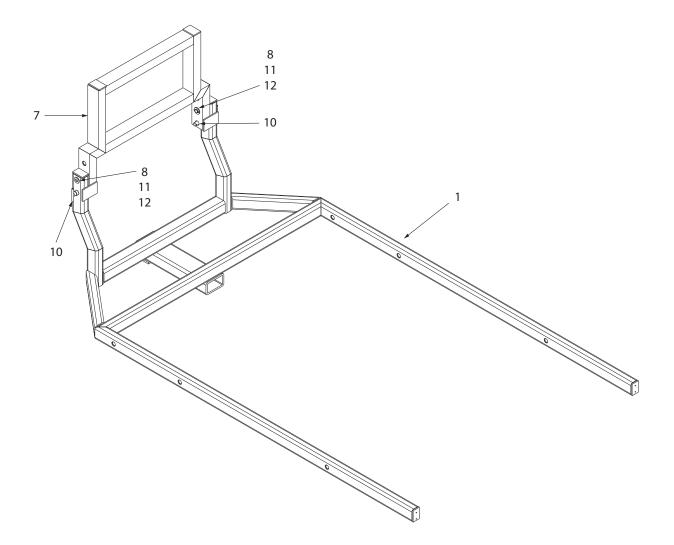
AGSE-E23707-S01 AFT Bumper Assembly
